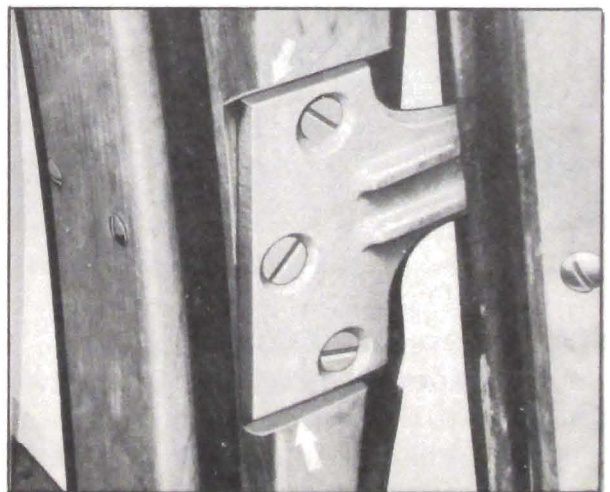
Points of Leakage at Rear Door Hinges—Lower Hinge Shown
